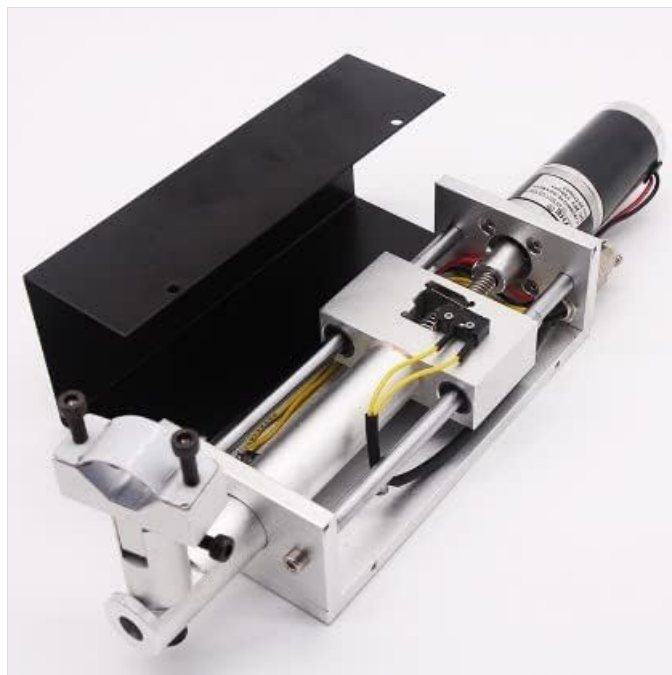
Wicocc CNC THC Cutting Torch Height Controller with mounting bracket. This view highlights the internal components and the included torch holder, demonstrating how the unit integrates with a plasma torch and attaches to a CNC gantry.
